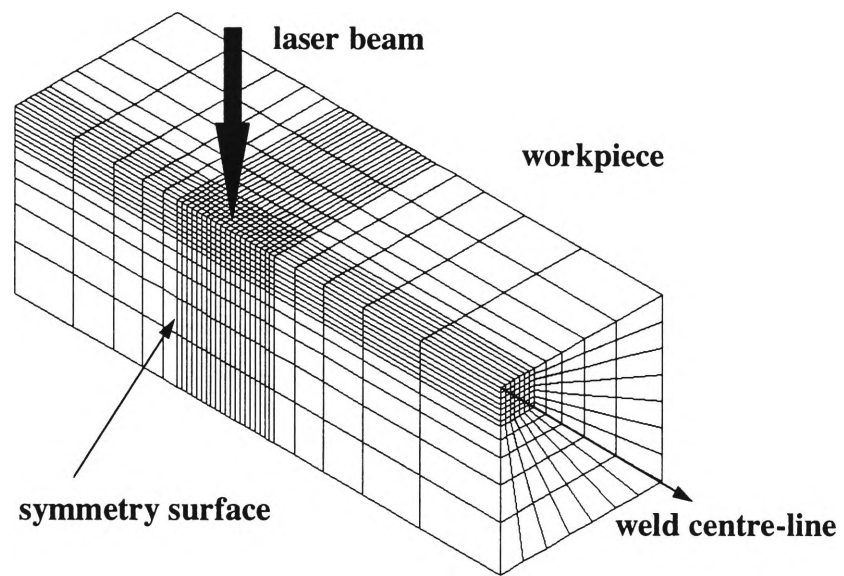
Finite element mesh for continuous or pulsed laser welding.
